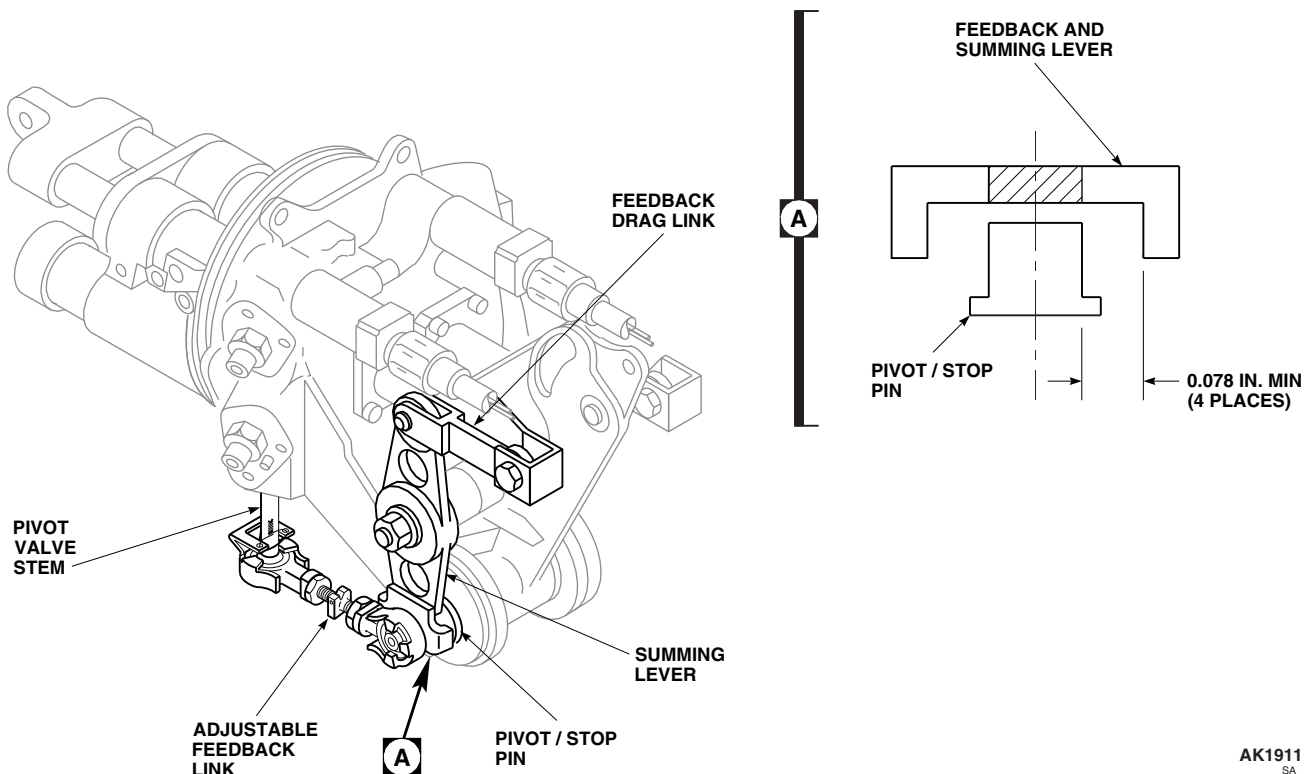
INSPECT FEEDBACK AND SUMMING LEVER
